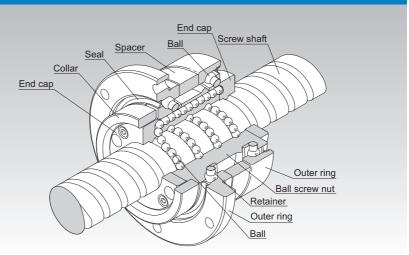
Structure of Large Lead Rotary Nut Ball Screw Model BLR
